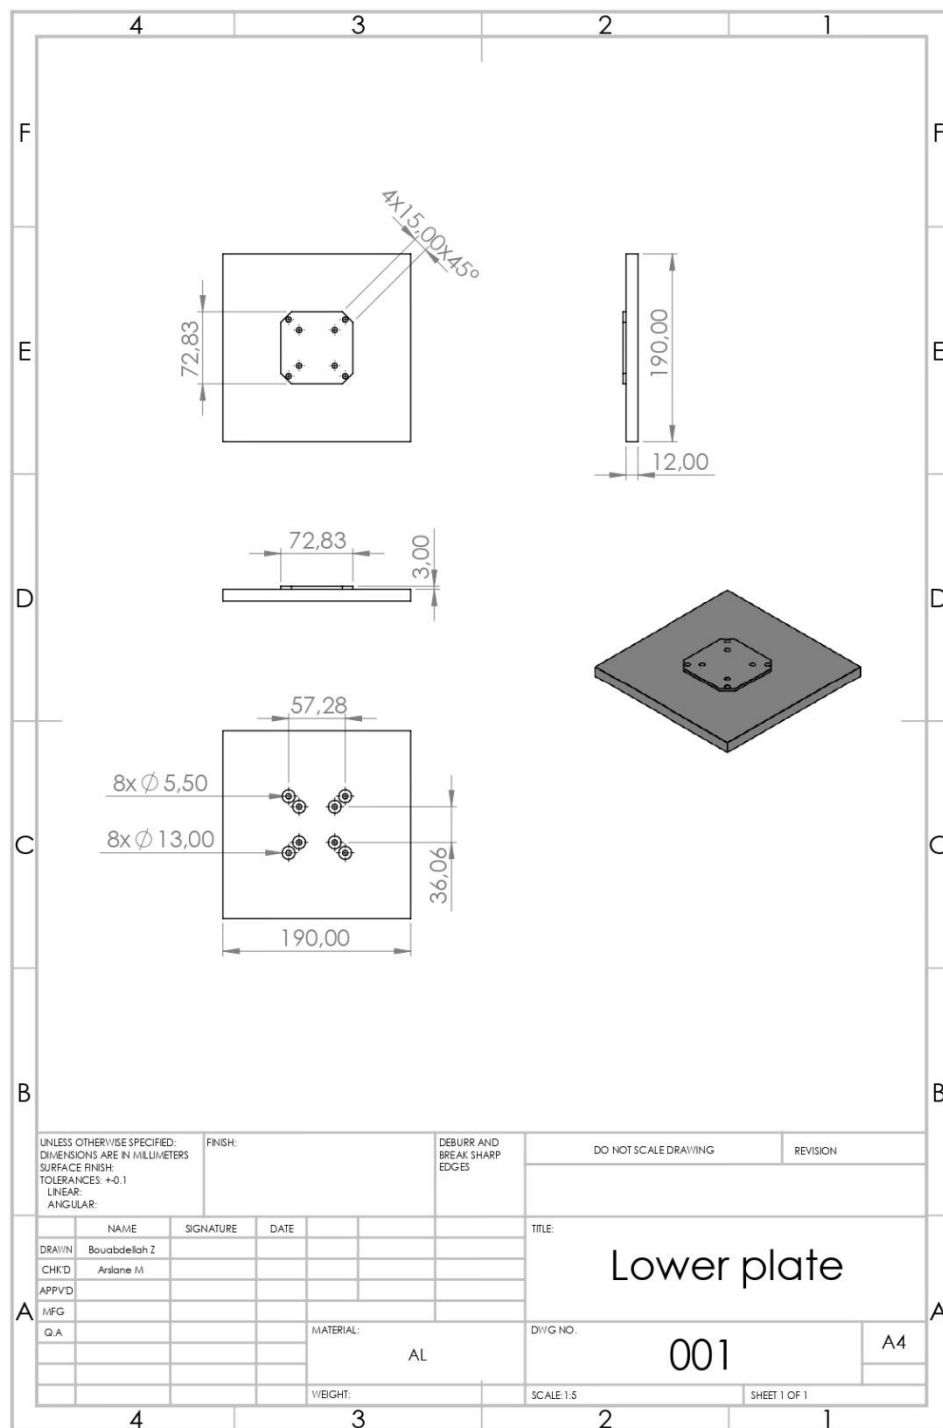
Standardized engineering drawing of the Lower Plates with dimensions
